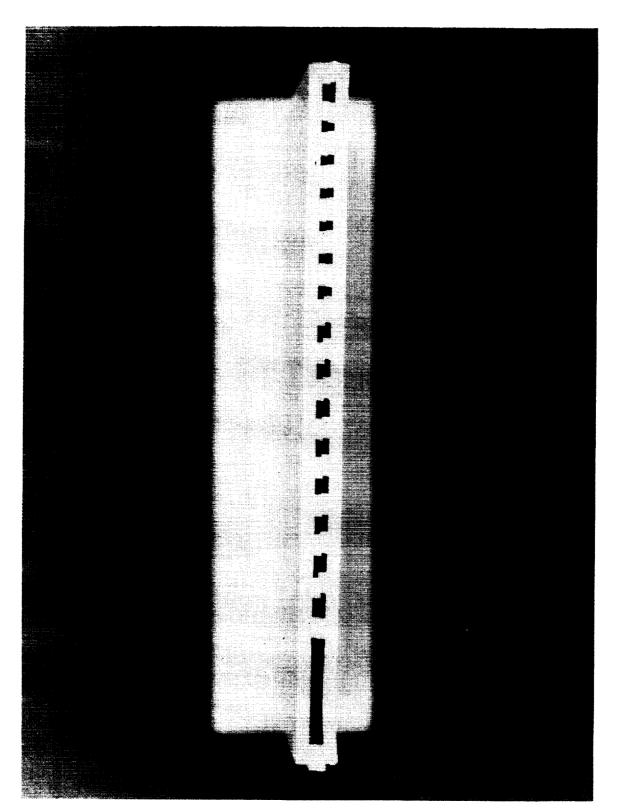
Edge View of Prototype Alumina Regenerator. The Warpage of the Vane Section is Due to Dragging of the Part on the Furnace Due to Shrinkage During Sintering
